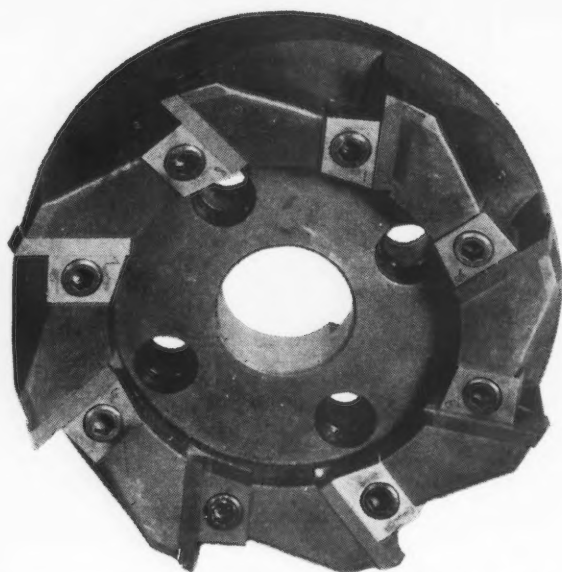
Designed specially for carbide milling, this 6-in. diam, eight tooth cutter incorporates a 7° negative radial rake with blades mechanically held by wedges and setscrews.
